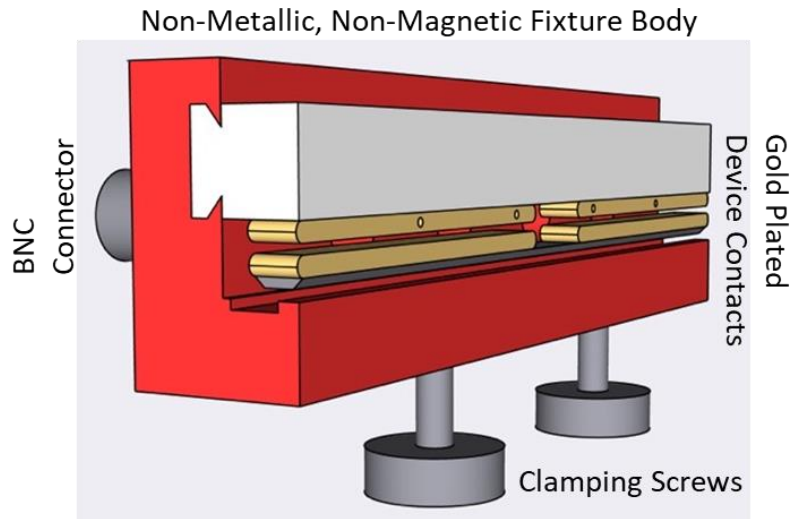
Newly designed Inductance measurement fixture made of non-metallic, non-magnetic fixture body.
